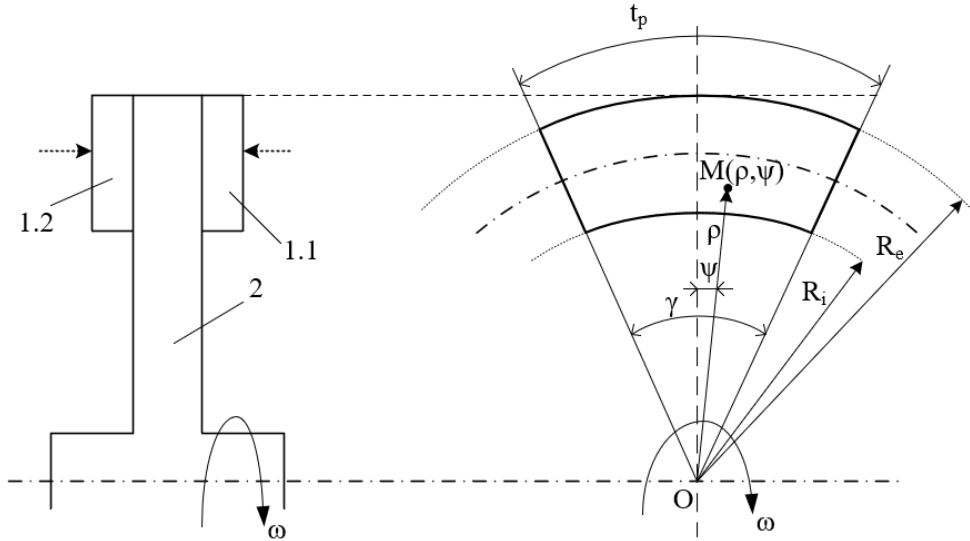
Brake system geometry at the contact area between the disc and the brake pads
